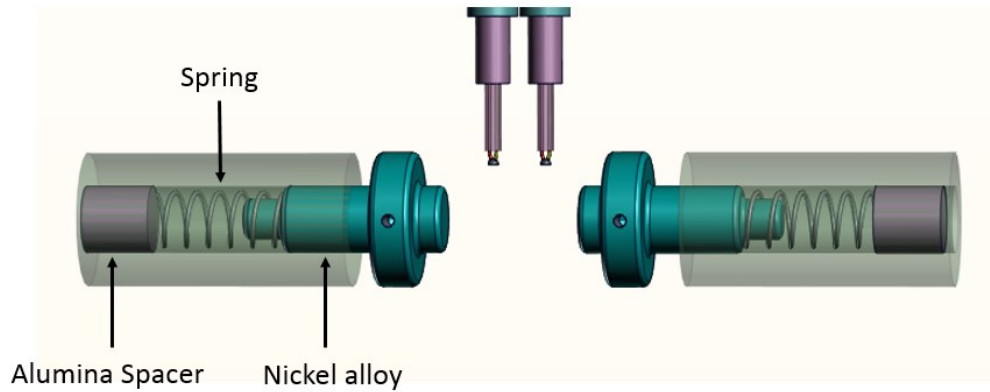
Close-up view of the current electrodes and the sample clamping mechanism.
